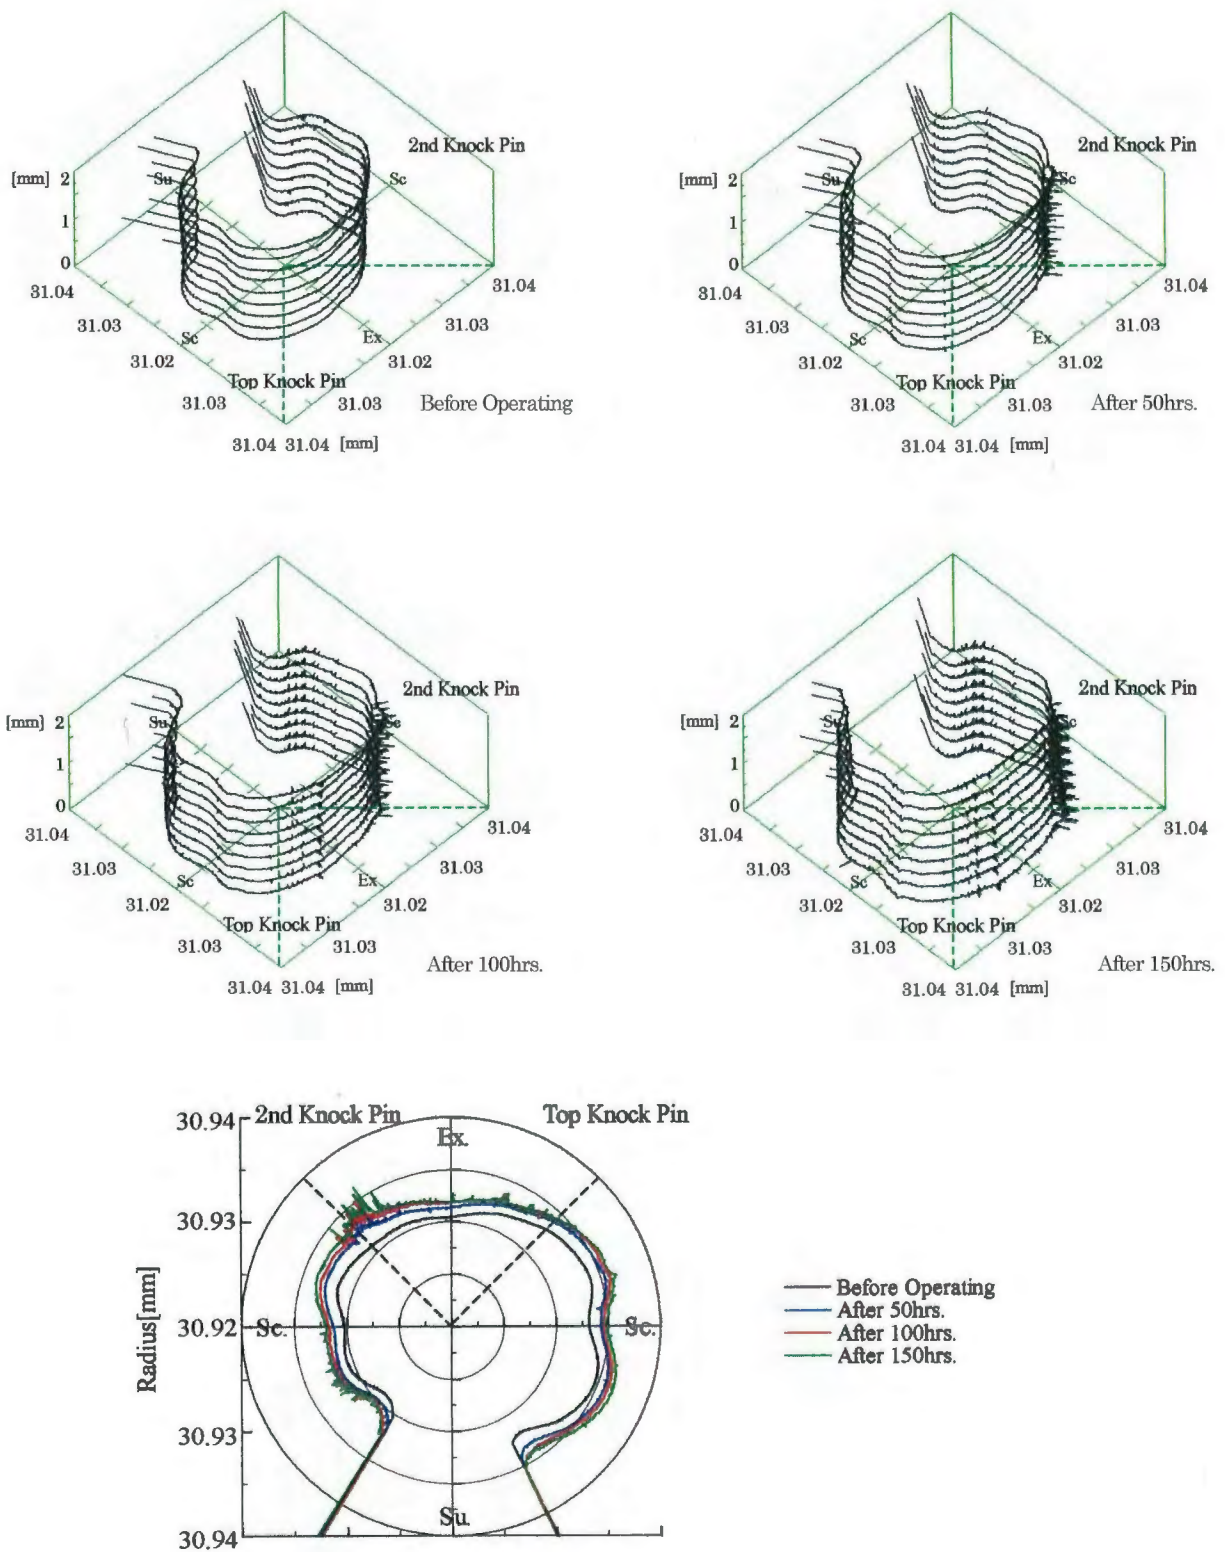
(h) The three dimensional and plane form of cylinder M2(RND8)
